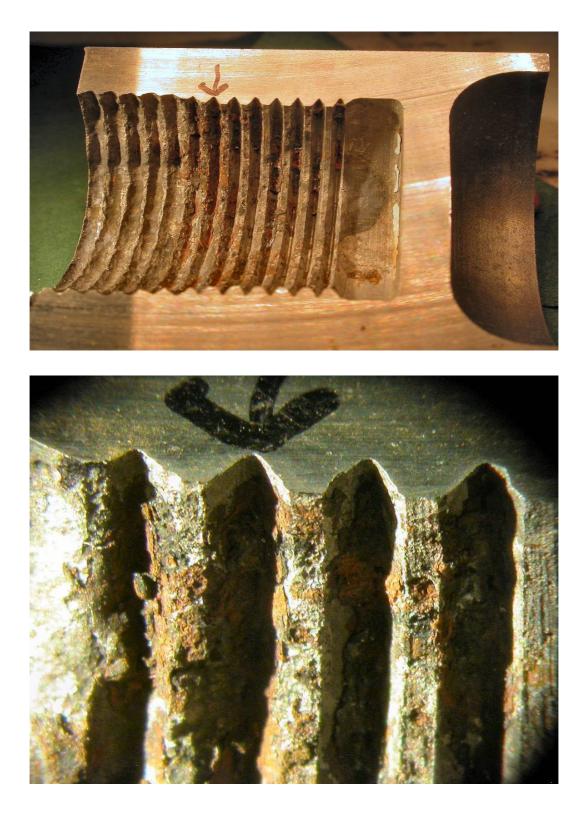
View of threads near bottom of piston rod. The arrow points to the last engaged thread.
